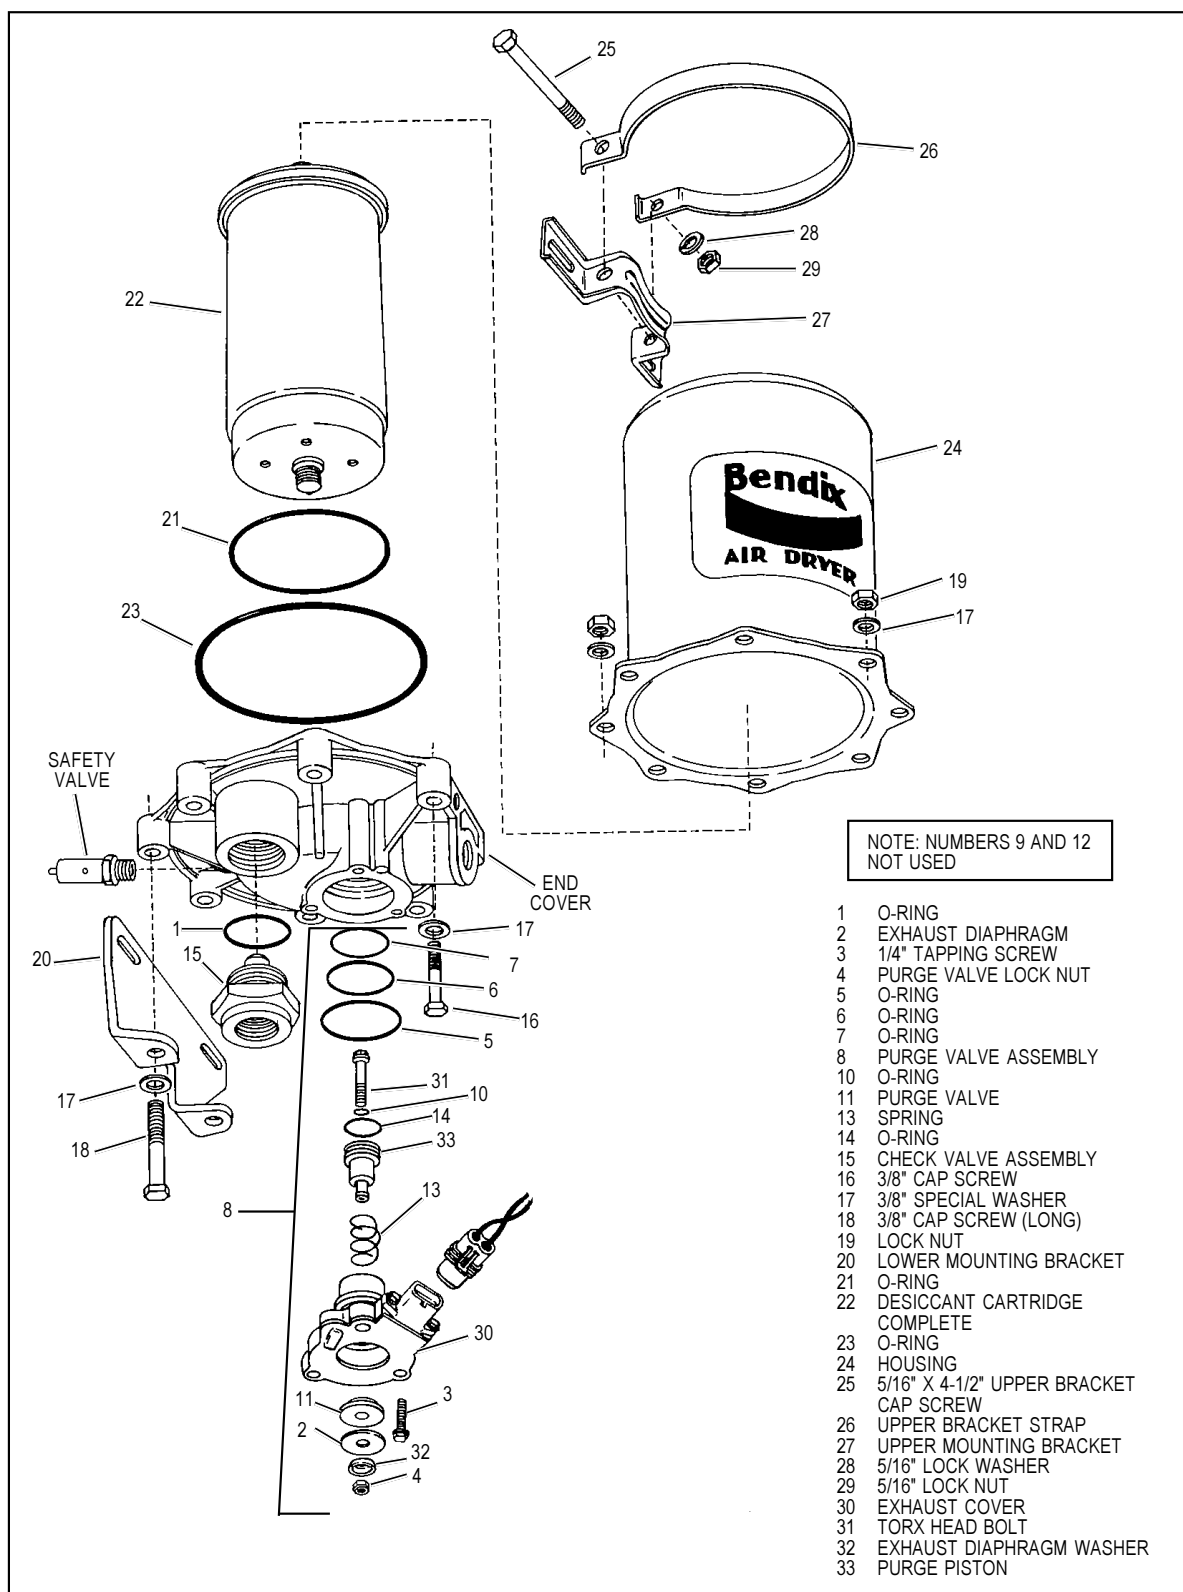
AD-9 AIR DRYER ASSEMBLY
